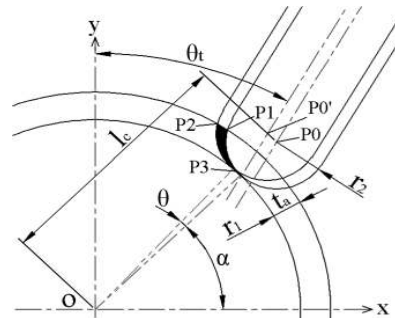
Schematic of sectional cutting chip area in the ball endmilling
